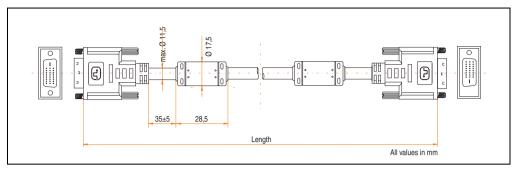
Dimensions - SDL cable 5CASDL.0xxx-00
